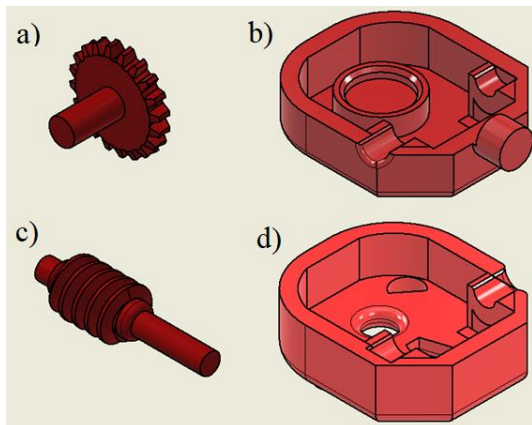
Three-dimensional model of the examined element: a) gear wheel, b) lower cover, c) worm, d) upper cover [13]
